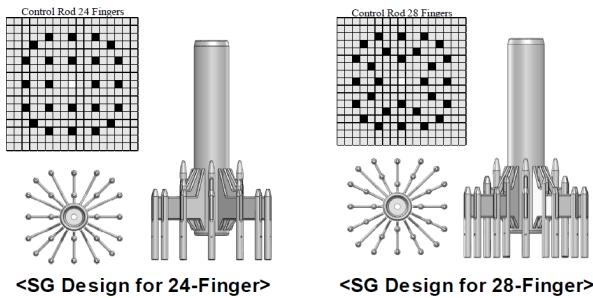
Comparison of fuel assembly array designs for 24- and 28-finger CRAs
